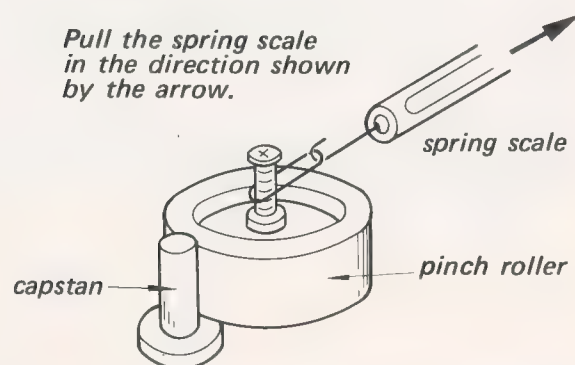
Pinch roller pressure adjustment (2)
